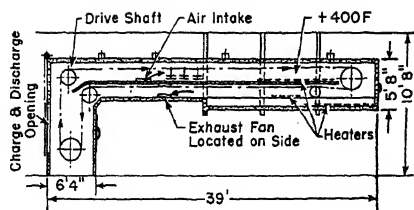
Two-story oven. Loading and unloading by one operator. The space under the horizontal branch of the oven can be utilized.
